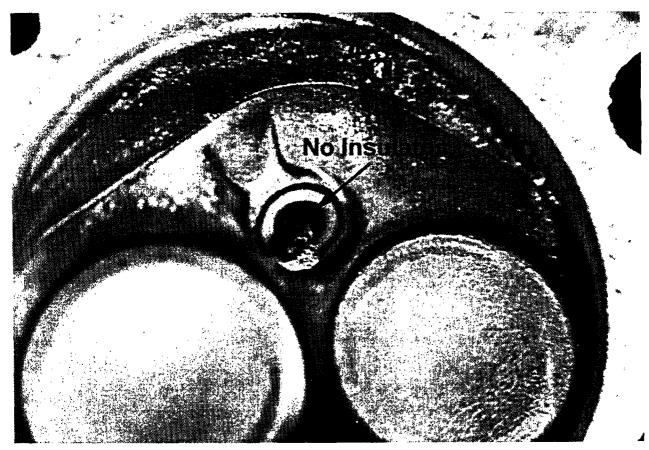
Cylinder head showing Cylinder 4 combustion chamber
